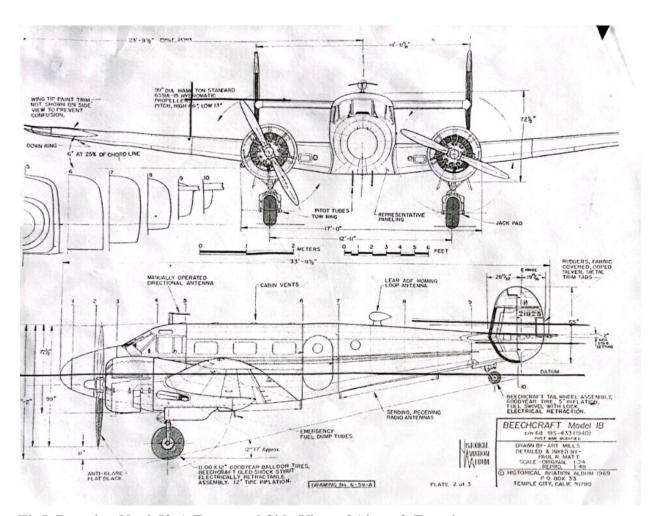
Drawing No 6-59-A Front and Side View of Aircraft Exterior
